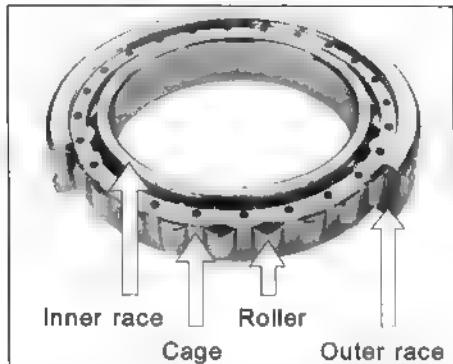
A cut-away single-row roller bearing showing the main components. Photo courtesy the Timken Company.
